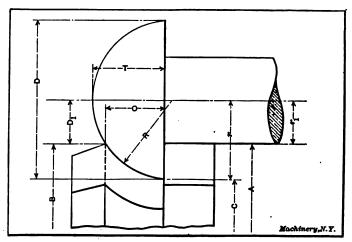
Diagram for Calculating Dimensions of Circular Tools forming Spherical Screw Heads
